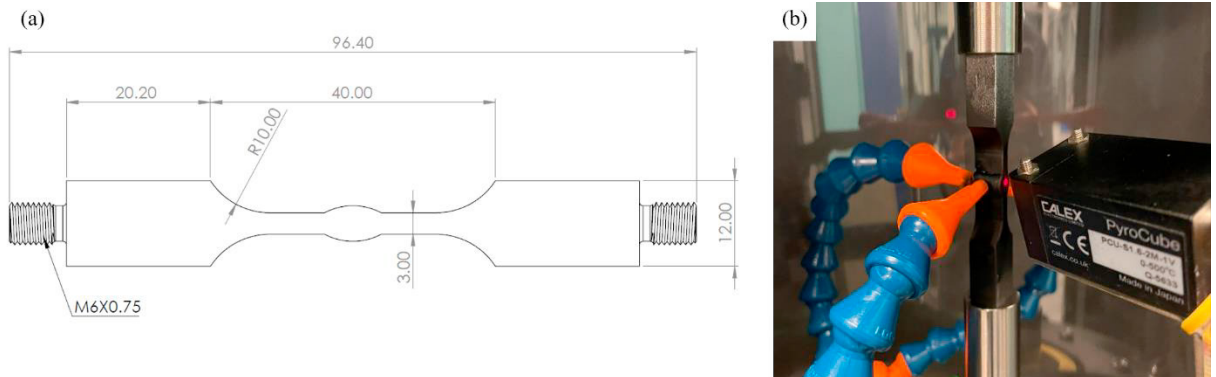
(a) Main dimensions of ultrasonic fatigue specimen; (b) specimen attached to USF2000A with cooling nozzles and infrared pyrometer.
